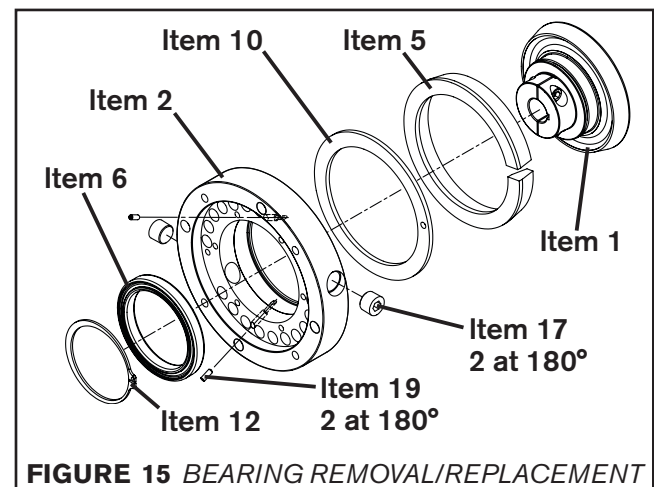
BEARING REMOVAL/REPLACEMENT
